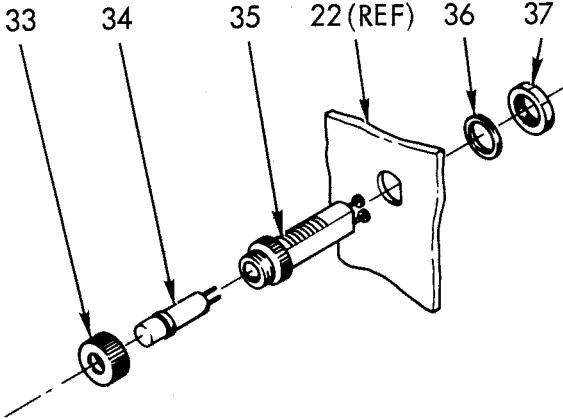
Panel/Chassis Assembly – Wired (Sheet 1 of 6)
